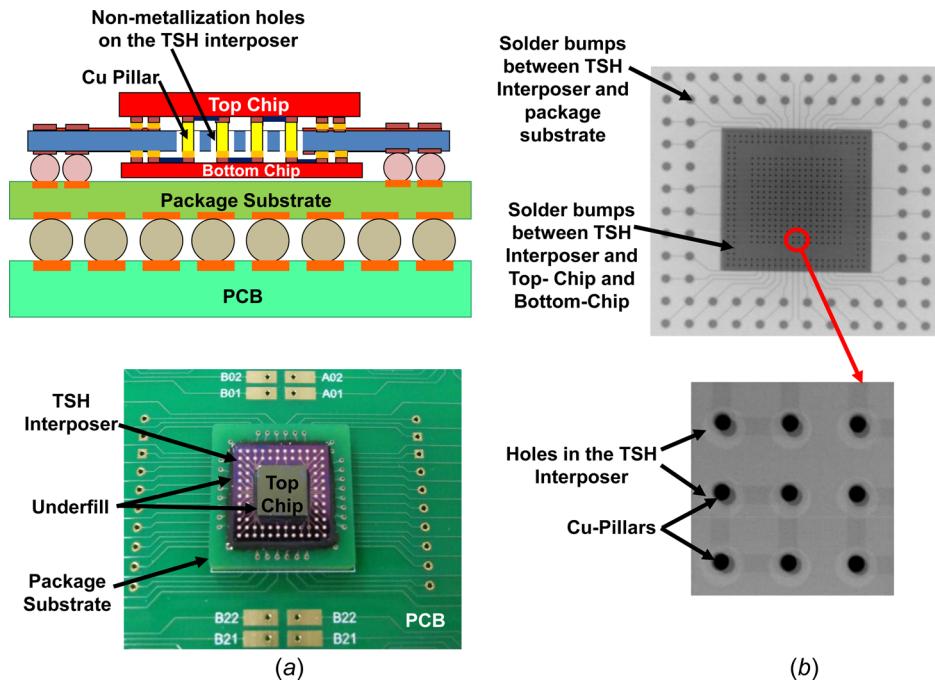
(a) TSH-interposer test vehicle and (b) X-ray images of the final assembly
